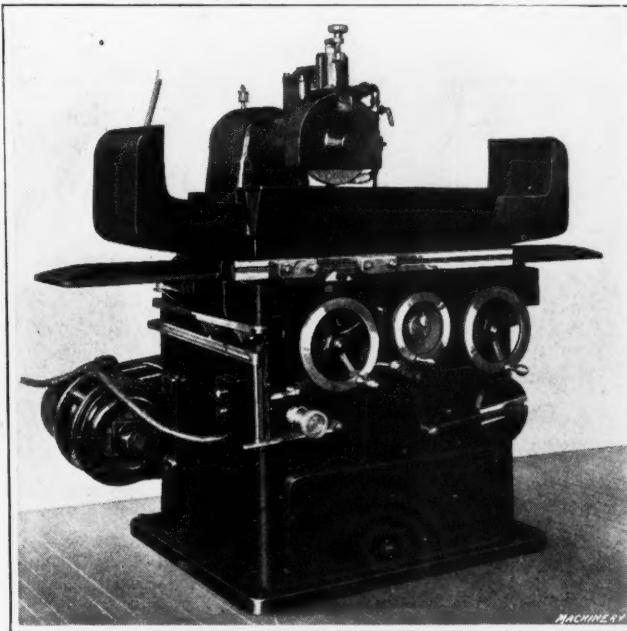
Surface Grinding Machine recently developed by the Diamond Machine Co.
